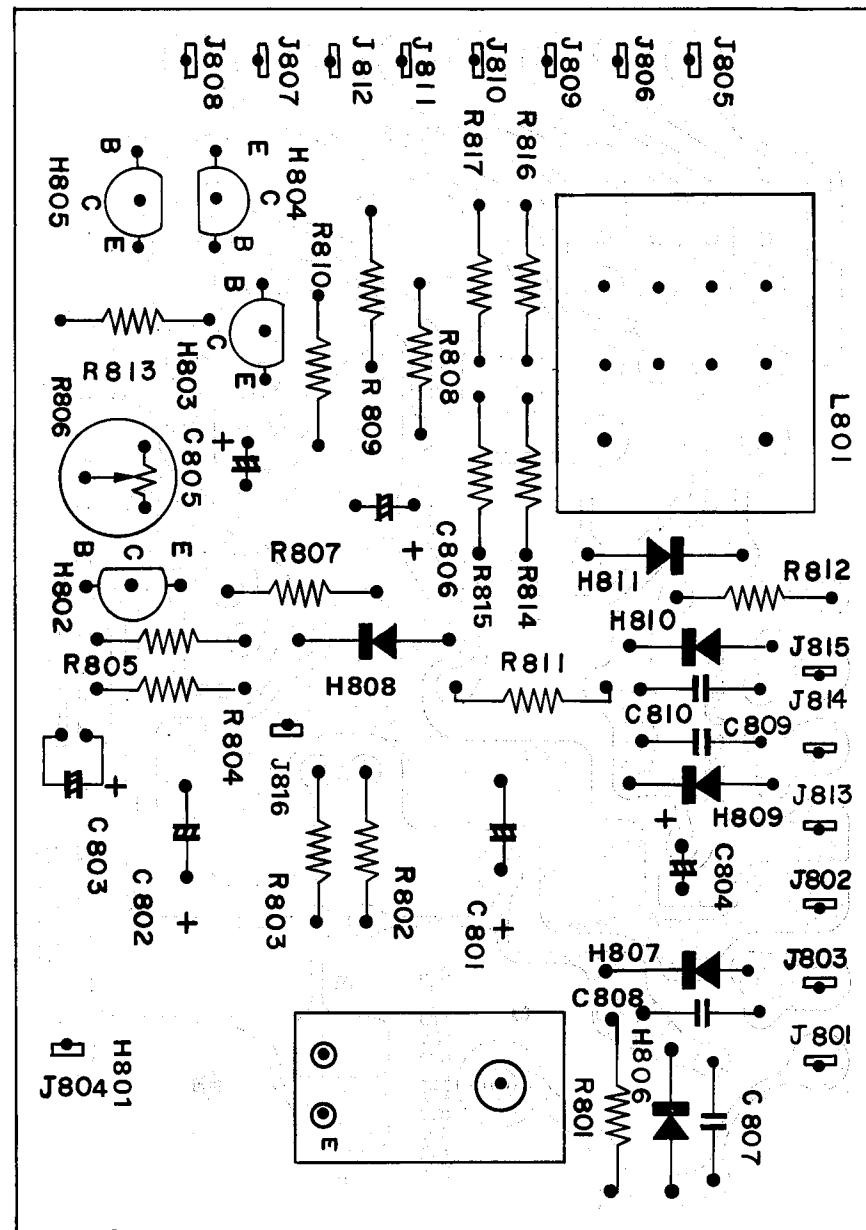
Balance Variable Resistor Unit Assembly P900 Component Locations
